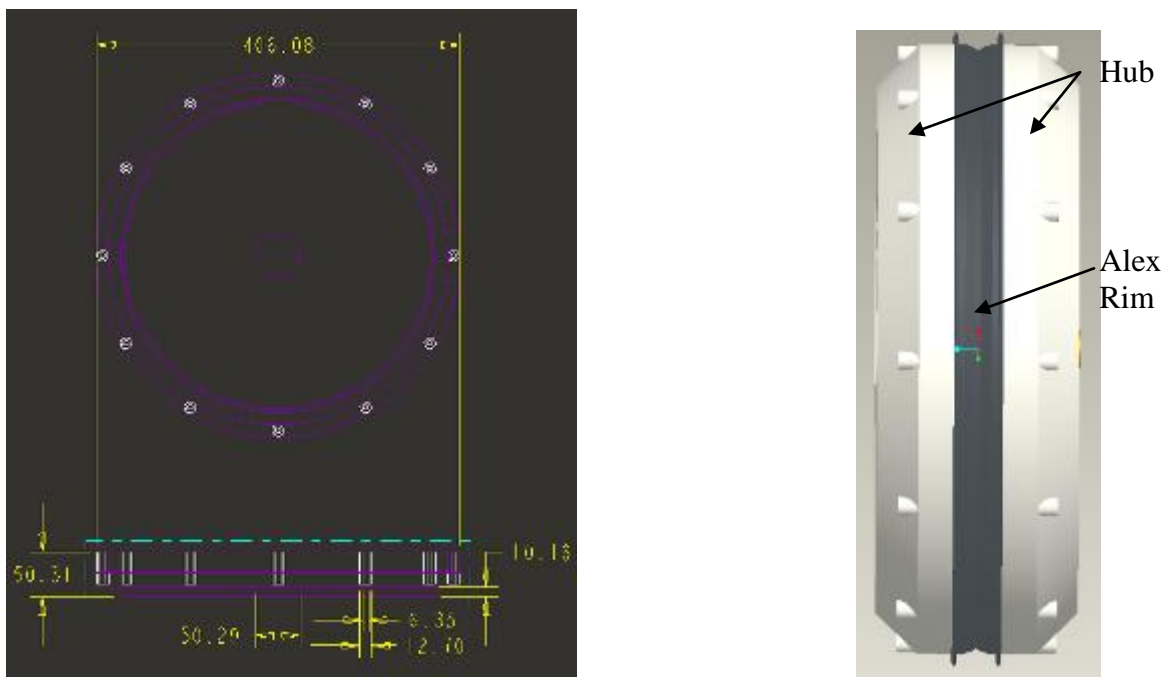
CAD drawing of major dimensions of Hub shows bolt and bearing locations. 3D CAD model shows hub bolted to rim
